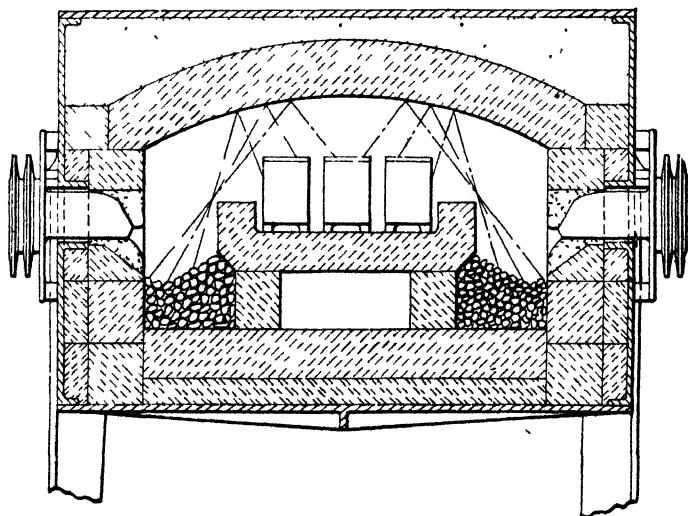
Semi-muffle type surface combustion furnace. (*Surface Combustion Company*)
